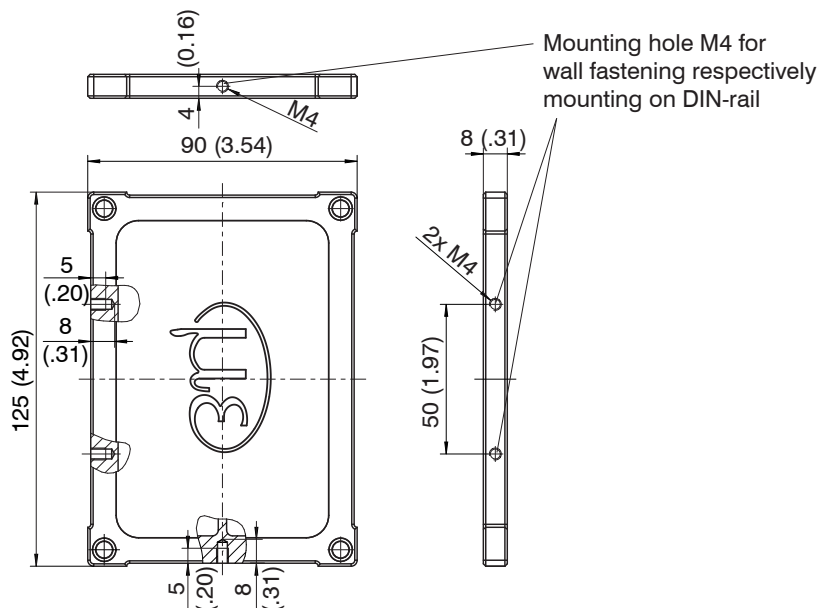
Dimensional drawing of housing cover, dimensions in mm (inches, rounded off)
